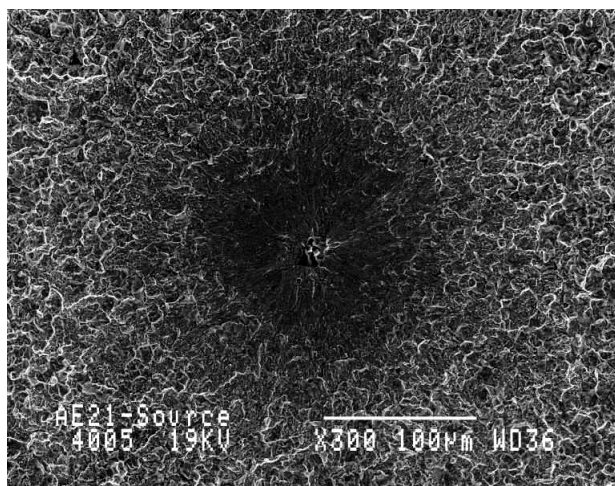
Broken section of a sample after fatigue test - Origin and initiation area of the fracture (Cylindrical dark area)
